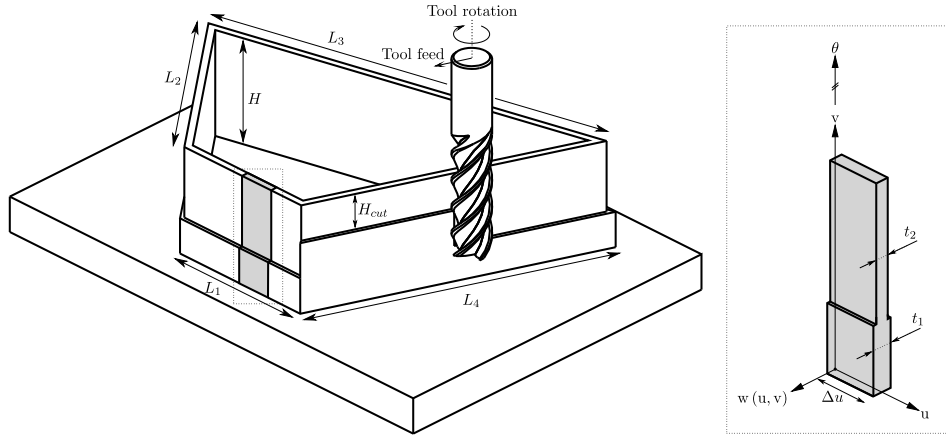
General four sided pocket structure (left) and single finite strip (right).
